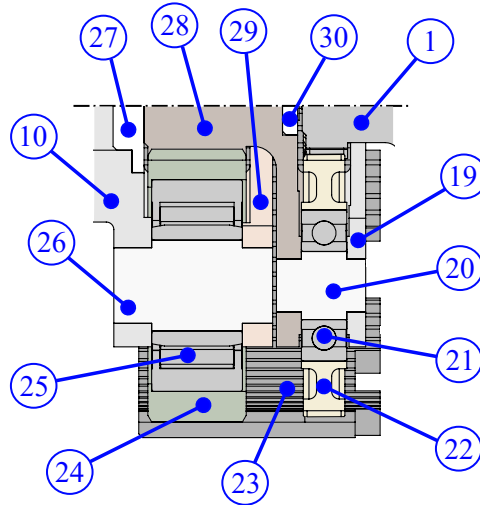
Side cut view detail of the gearbox multiplier. First stage: input shaft/carrier (10), planet [$\times 3$] (24), needle bearing [$\times 3$] (25), pin [$\times 3$] (26), plastic end stop (27), carrier flange (29). Second stage: carrier flange (19), pin [$\times 3$] (20), ball bearing [$\times 3$] (21), planet [$\times 3$] (22), plastic end stop (30). Electric machine rotor/second stage sun gear (1), outer ring gear (23), first stage sun gear/second stage carrier (28).
